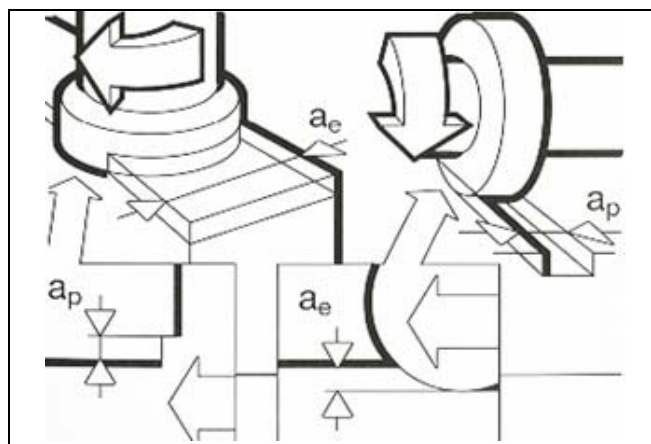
Cutting depth in face and peripheral milling (Sandvik, 1994).
